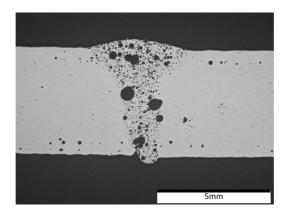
Laser weld seam in laser additive manufactured AlSi12
